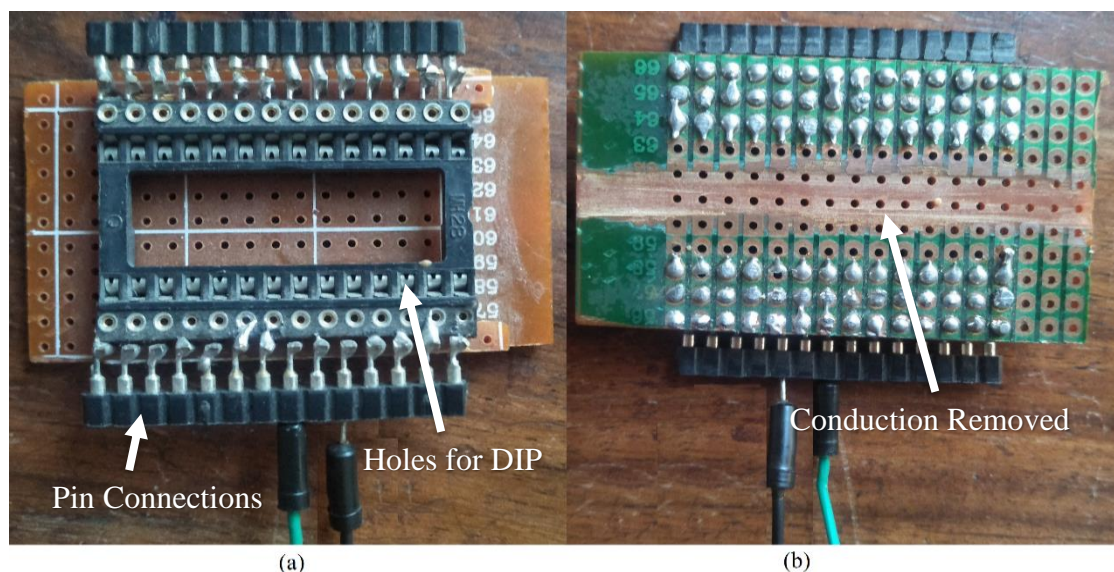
(a) Front Side View of JIG (b) Back Side View of JIG
